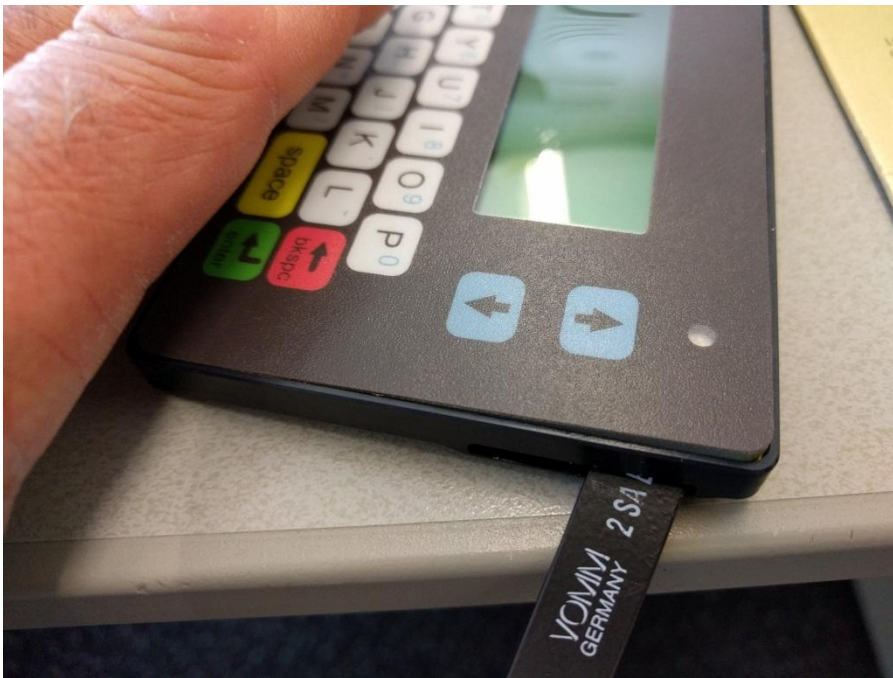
Lifting the PCB until it is above the edge of the aluminium enclosure.
